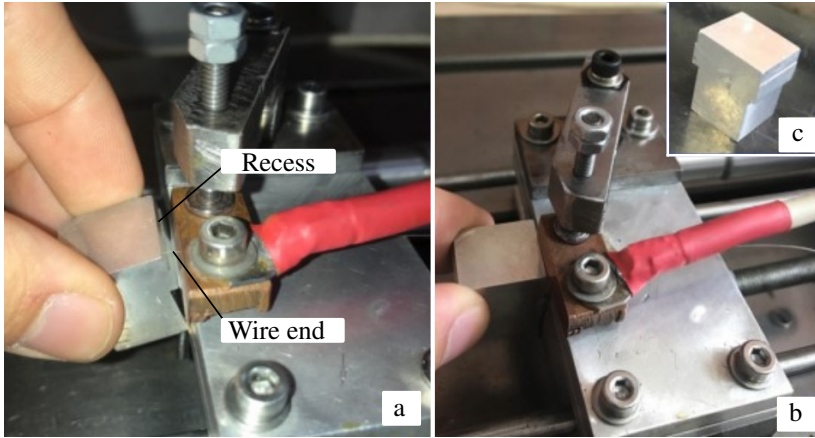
Die opening adjustment a) part abutted on the wire end b) wire end pushed into the groove c) die opening caliper.
